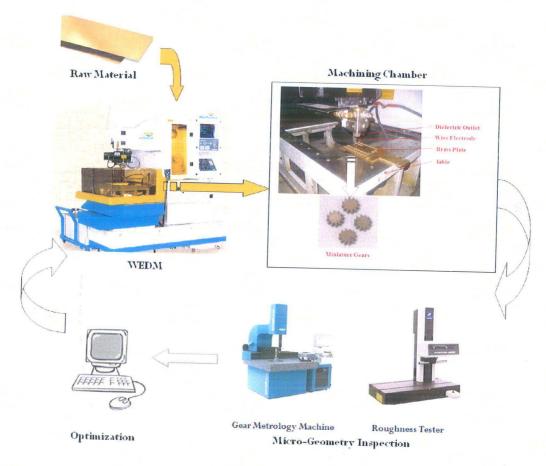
Tasks and equipments used in experimental investigations on miniature gear manufacturing by WEDM.
